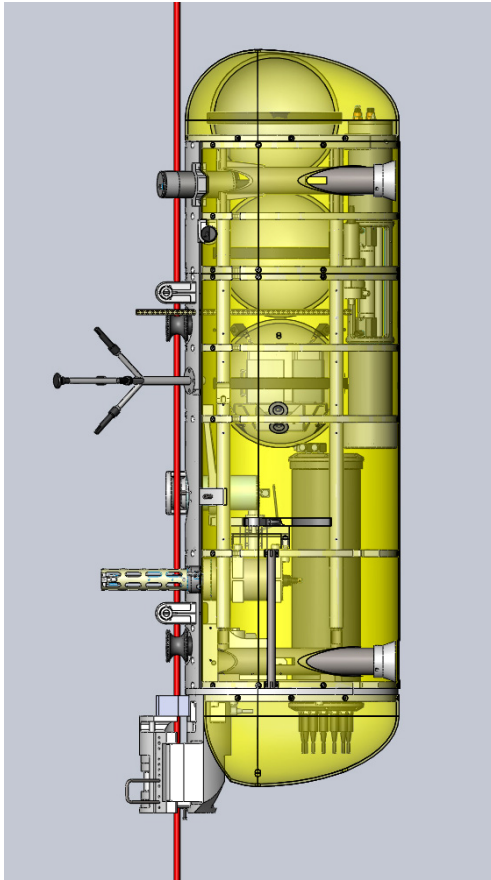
Solid model of RSN Deep Profiler showing the sensor and components inside the skin.
